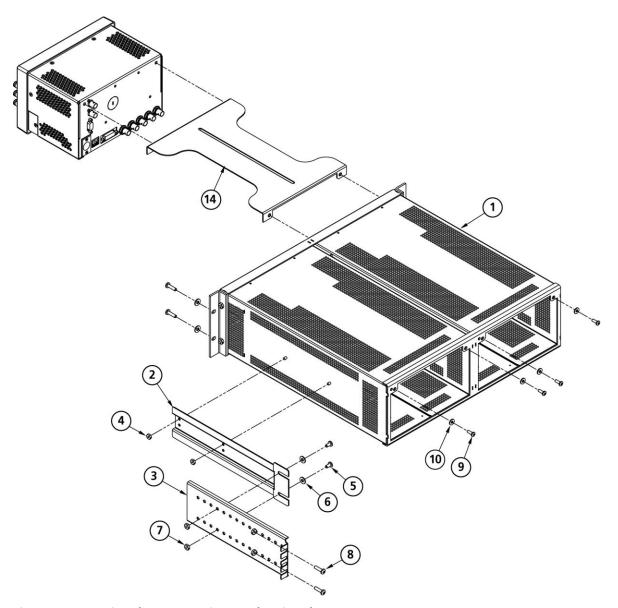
Mounting the CMN-91 in a Rack Using the DRC-2A
